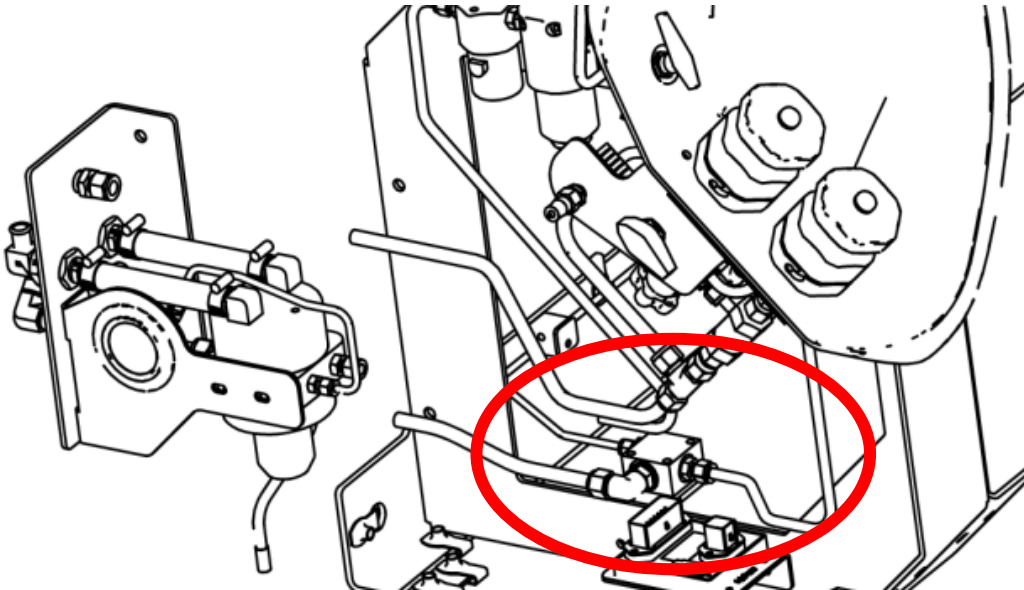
Side mount system area PRD location. Access to the PRD body, vent tube and trigger line fitting is needed. (FMM side shown, non-FMM side mount PRD location is similar.)
